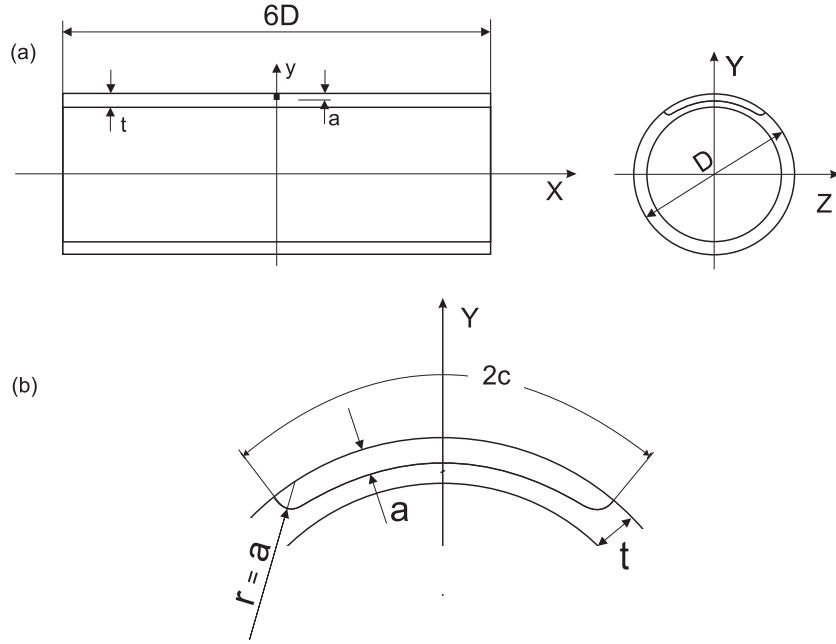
(a) Pipe geometry with an external circumferential constant-depth surface flaw. (b) Details of the constant depth surface defect with arc length, $2c$, depth, a , and end radius, r , equal to the crack depth, a .
